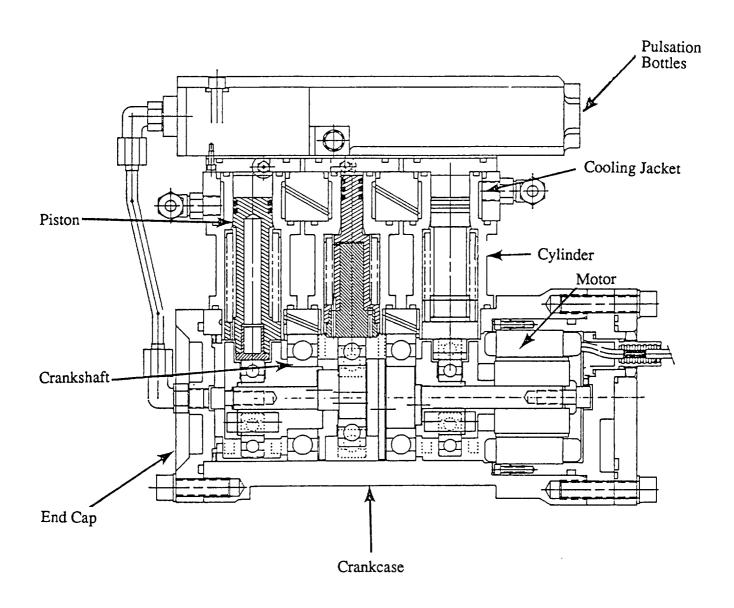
PROTOTYPE COMPRESSOR LAYOUT
